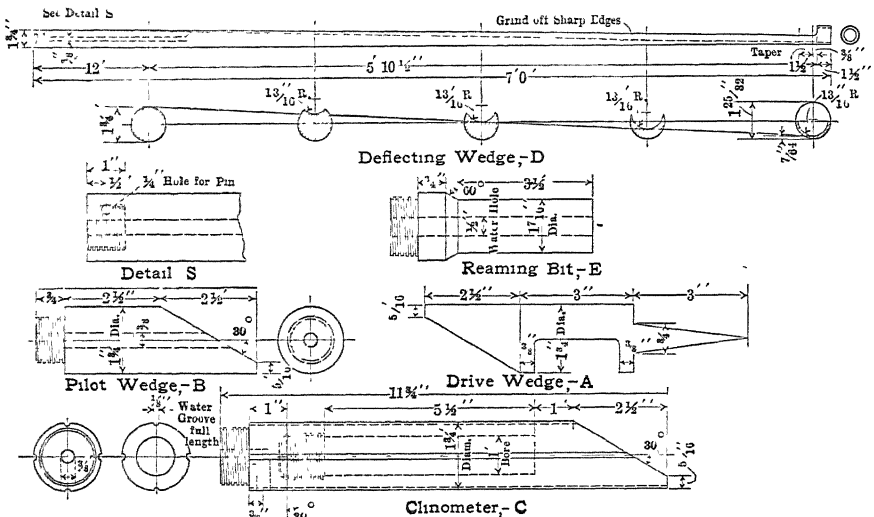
WEDGES AND CLINOMETER FOR "A" RODS.
